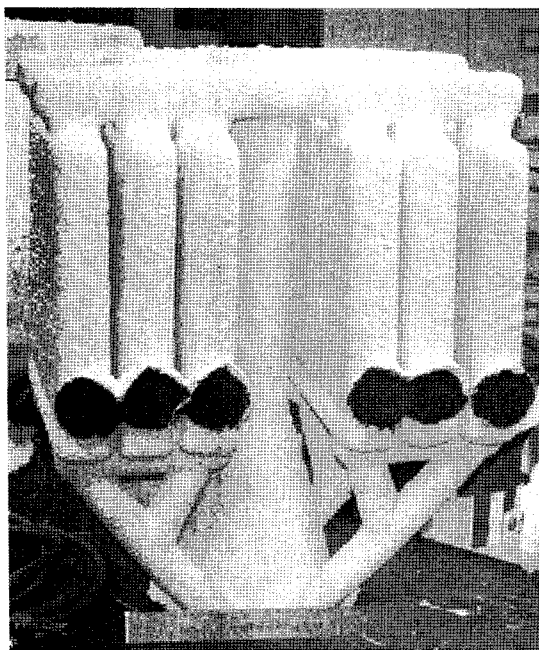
Investment mold used to produce six cast Ti-6Al-4V plates.
